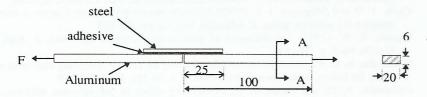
Drawing of single strap joint specimen (dimensions in mm)
